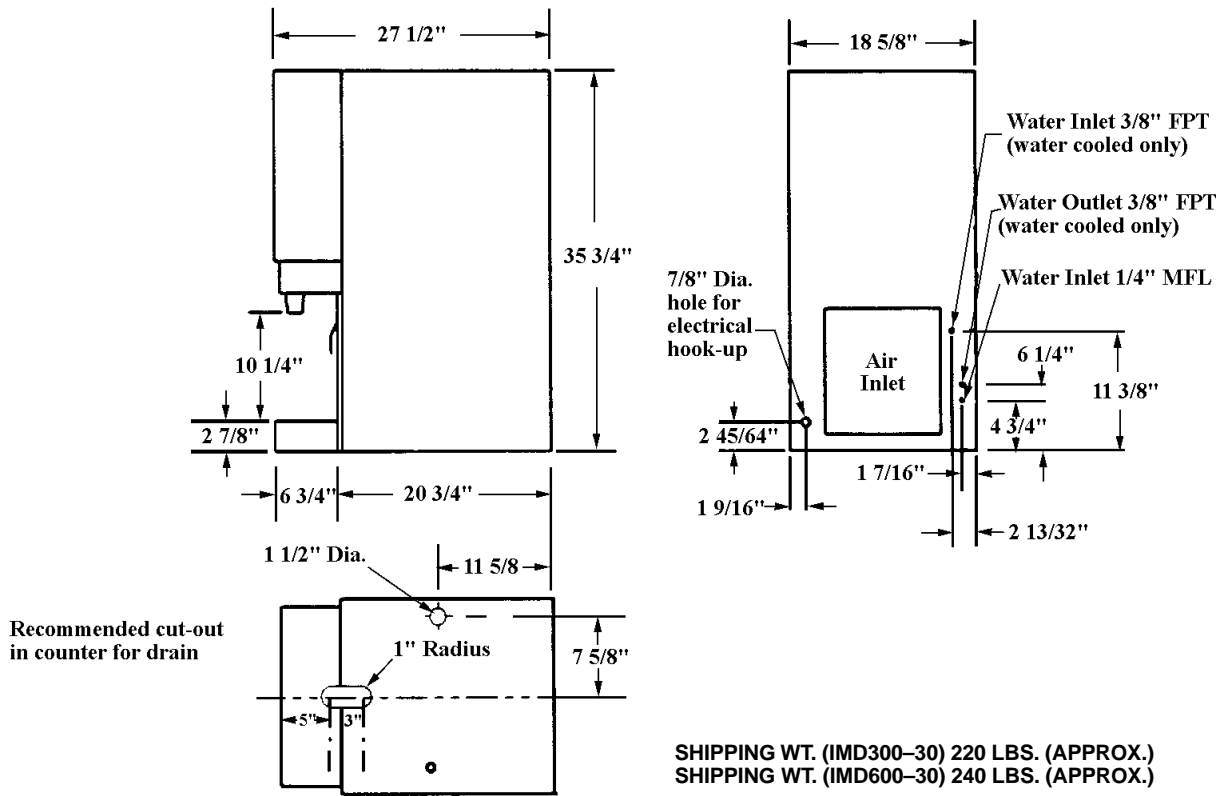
DIMENSION DRAWINGS (30 LBS.) IMD300-30 AND IMD600-30
